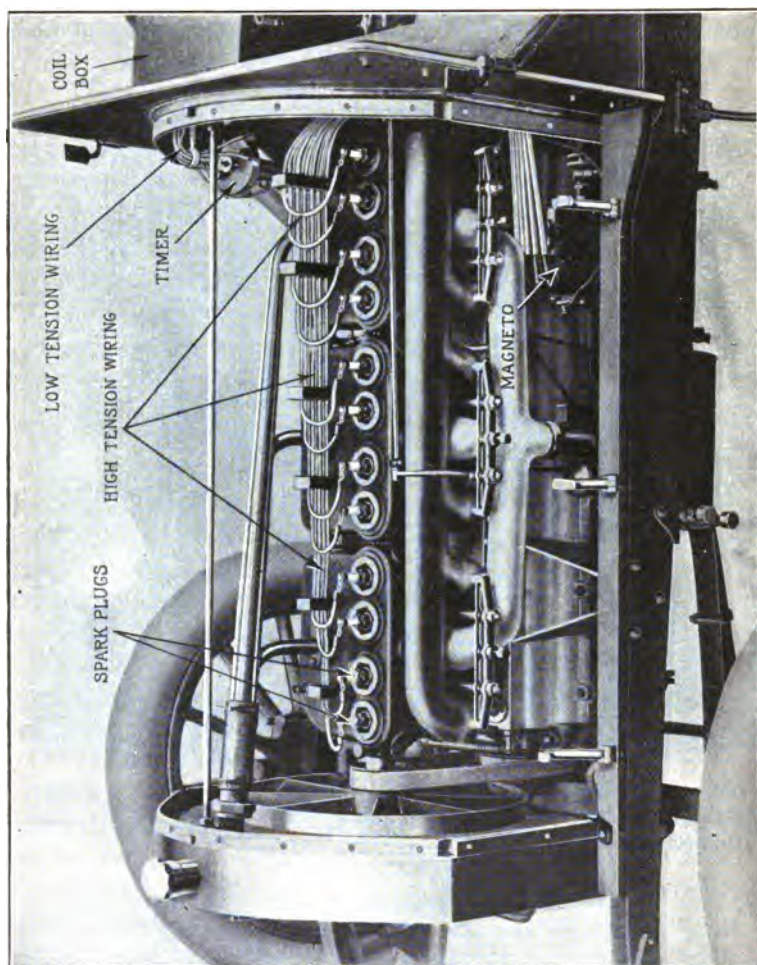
View of Stevens-Duryea Six Cylinder Power Plant Showing Arrangement of Parts of Double Ignition Systems.
